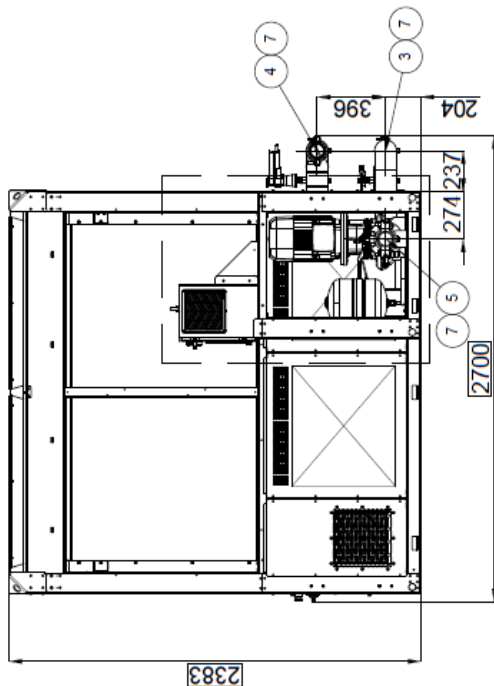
Transport Kit, Container Kit and Shipping dimensions dimensional drawing
